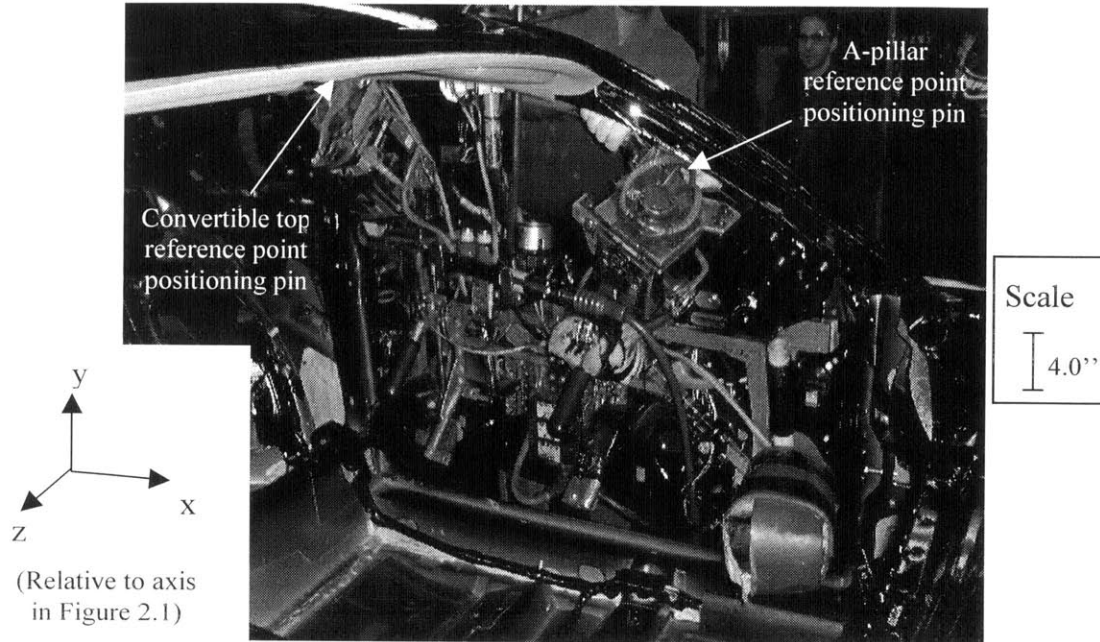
Door Glass Setting Fixture – Clamped Position.
